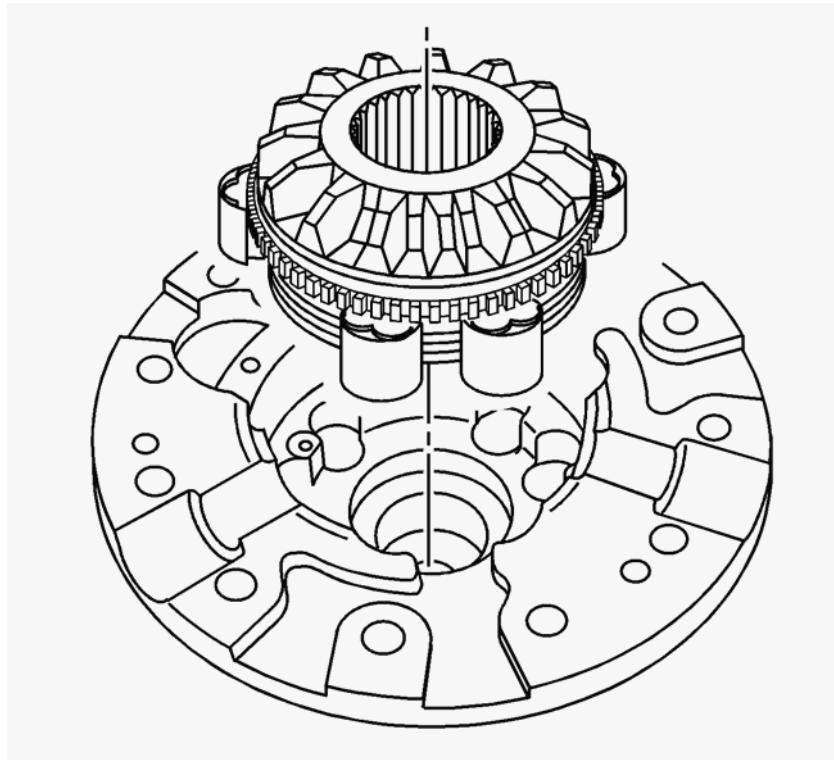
Right Side Cam Unit And Clutch Plate Assembly
